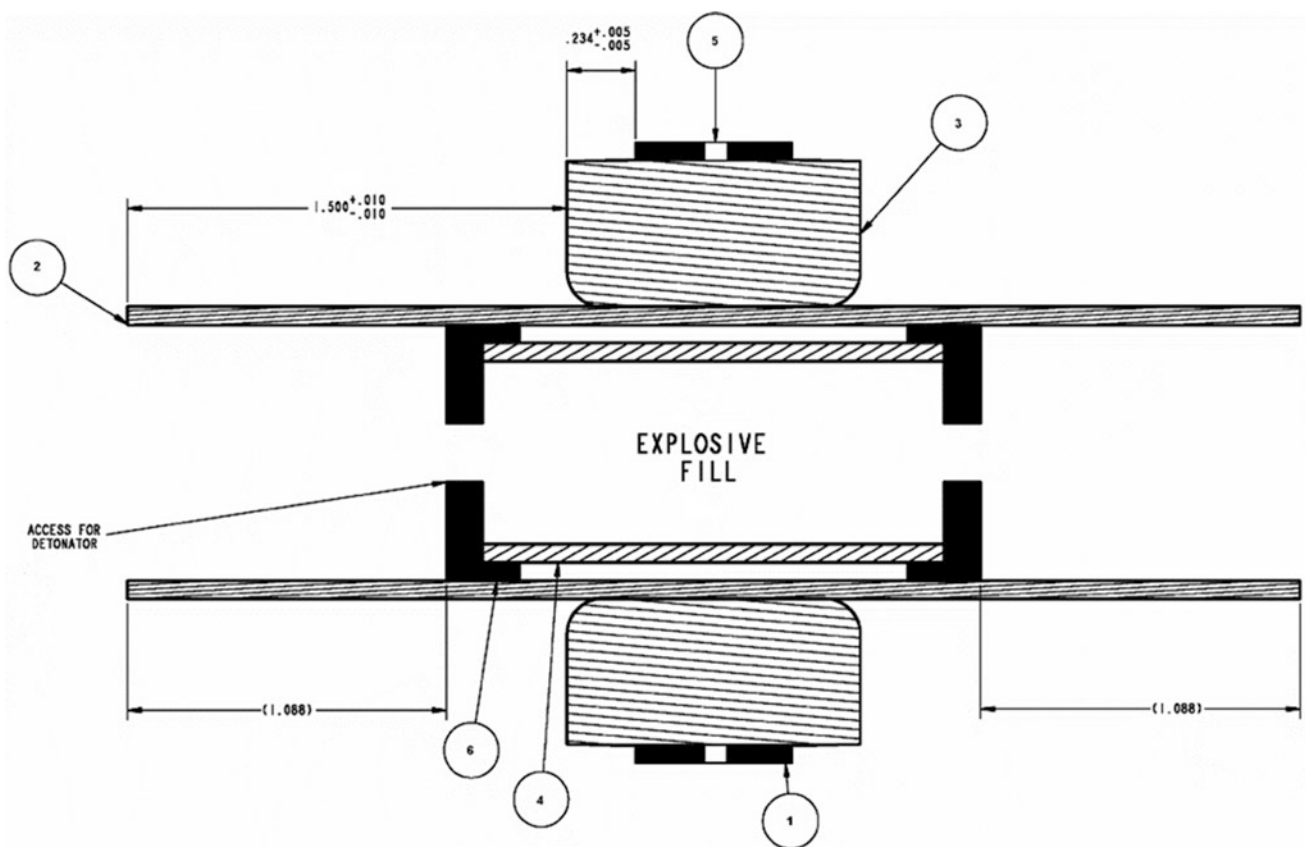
A diagram example of the experimental assembly for the expanding ring experiment. (1) Buffer rings, (2) Copper tube, (3) maraging 350 steel driver, (4) Plastic tube, (5) Sample ring, (6) Foam caps to position the explosive and detonators
